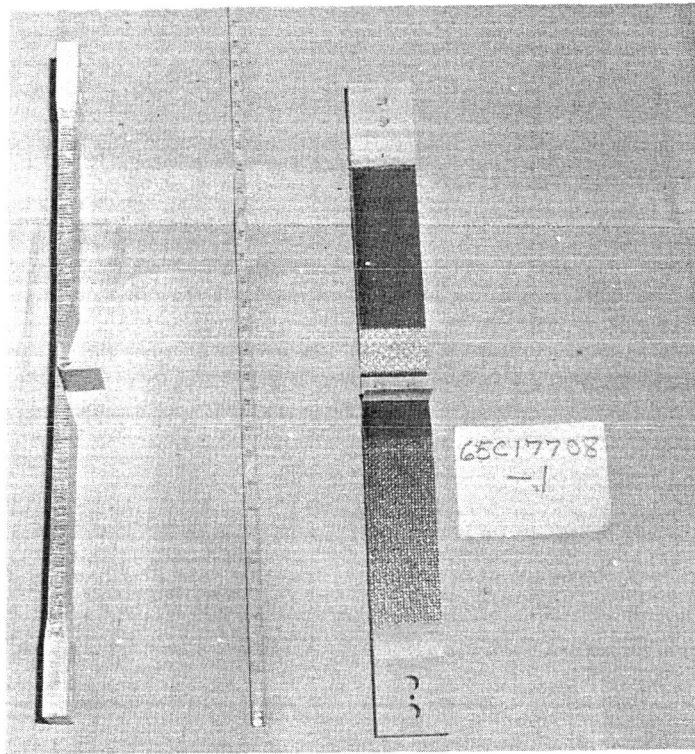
Panel-to-Rib Pad (Test 8) Showing Typical Test Specimen
